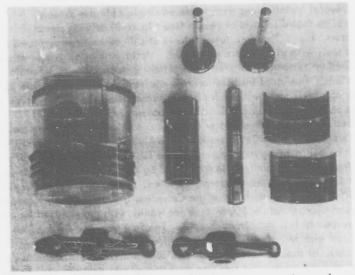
Piston assembly parts showing severe scoring and wear (lubrication with MIL-O-10295 oil).
